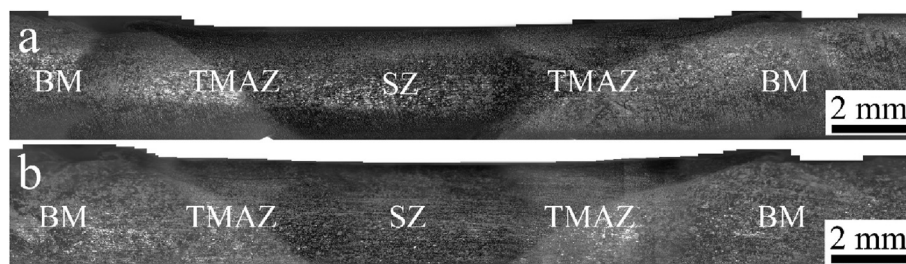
Macrographs of the joints welded using: (a) H13 tool, and (b) WC tool. The macrographs were produced by combining several OM images.
